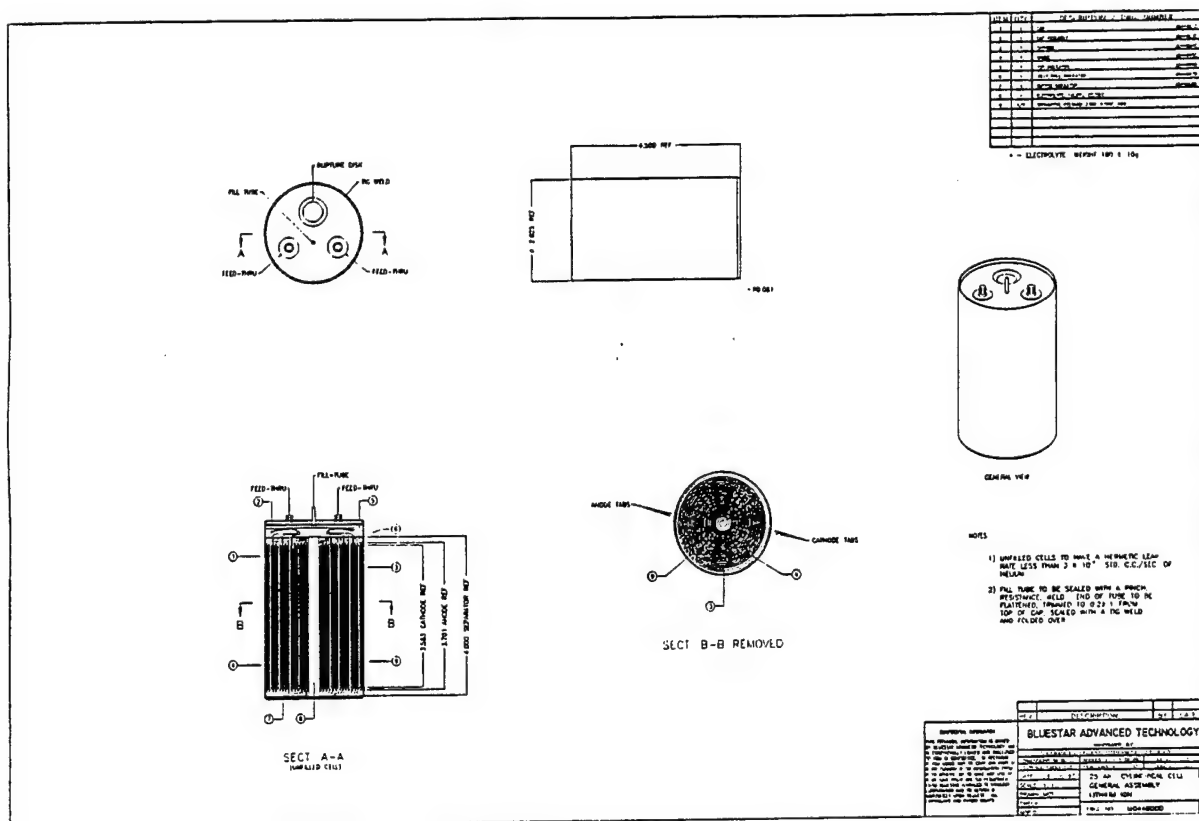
General assembly drawing of 25-Ah Design II cylindrical cell.
